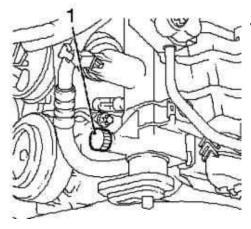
Drainage bolt heatsink: 1 - bolt
